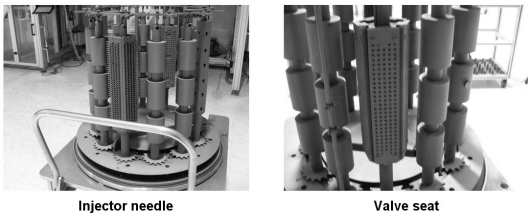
Photos of Coating rig of injector needle valves and valve seats.
